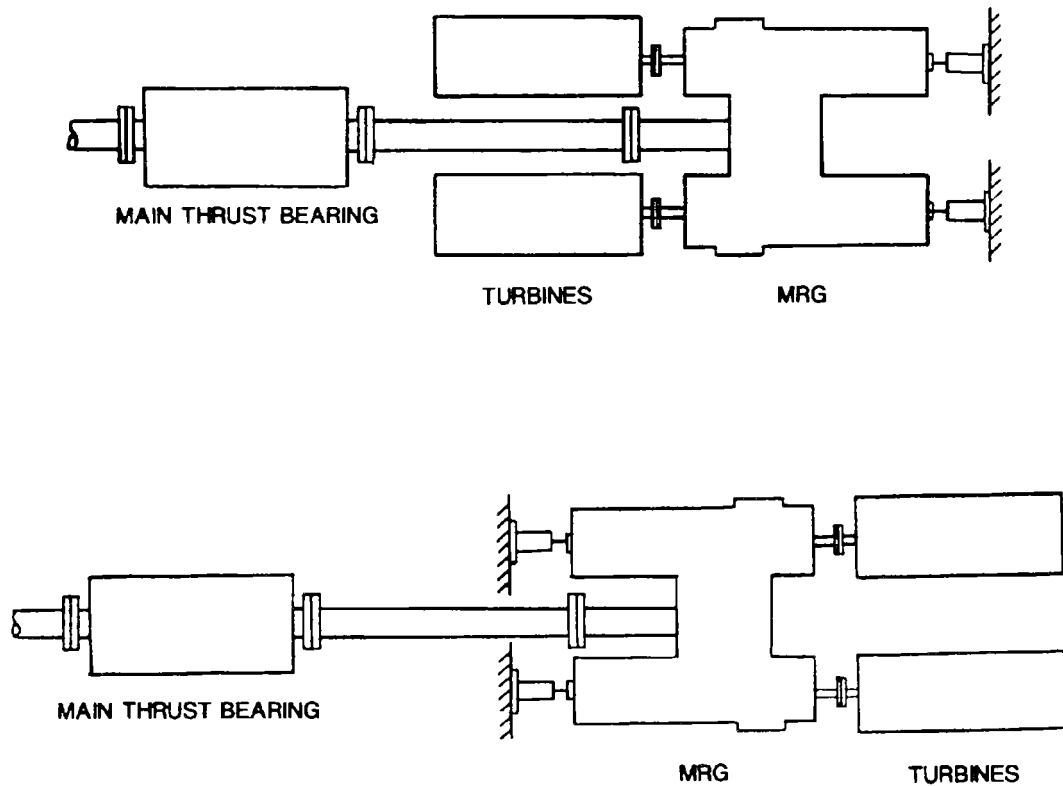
Surface Ship Remote Mount Thrust Bearing Arrangement
